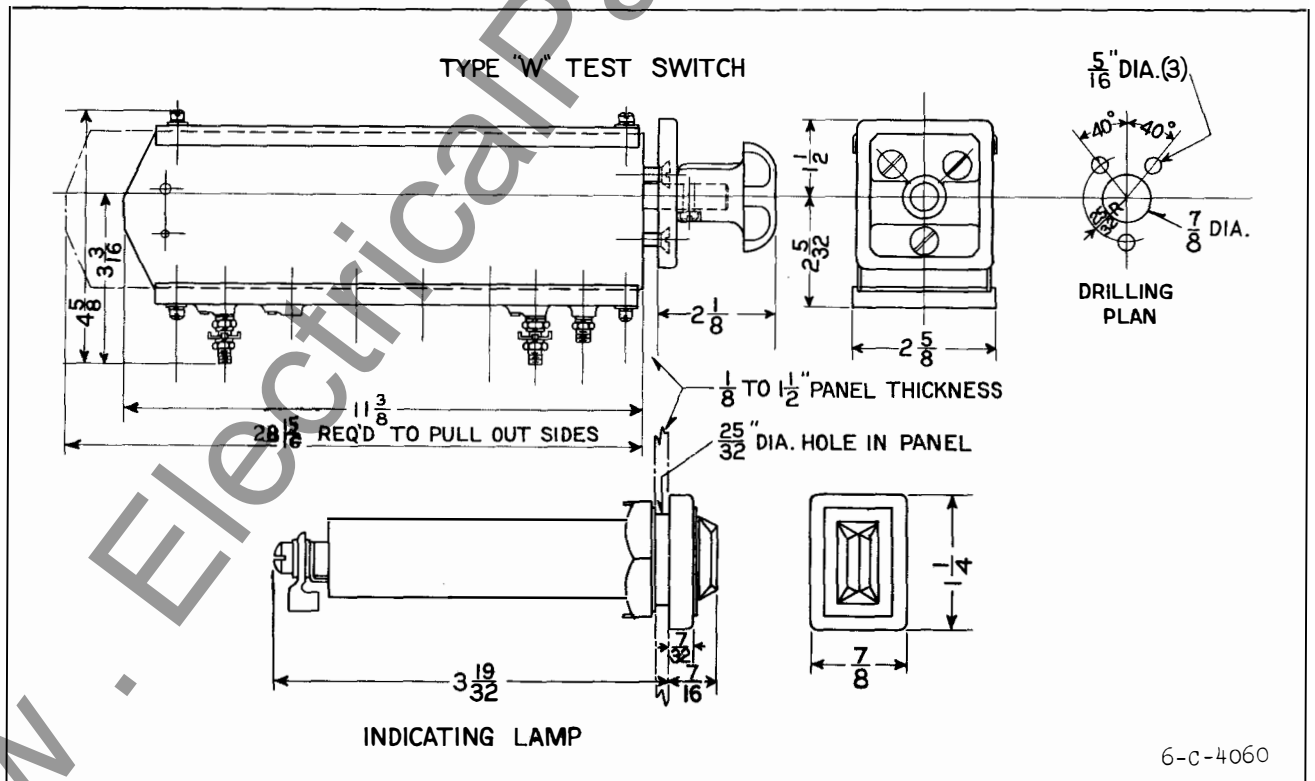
Outline And Drilling Plan Of The Type W Test Switch And Indicating Lamps Which Are Part Of The Type HKB Test Facilities. For Reference Only.
